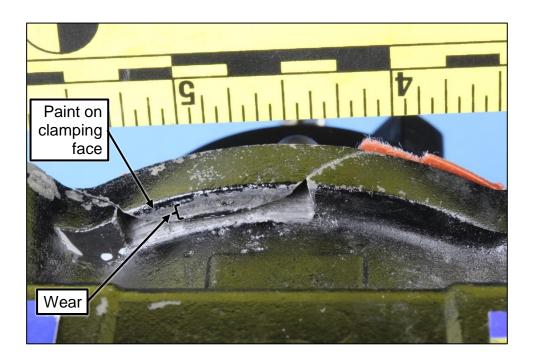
View of the upper side of the magneto showing the clamping face of the attachment flange.
